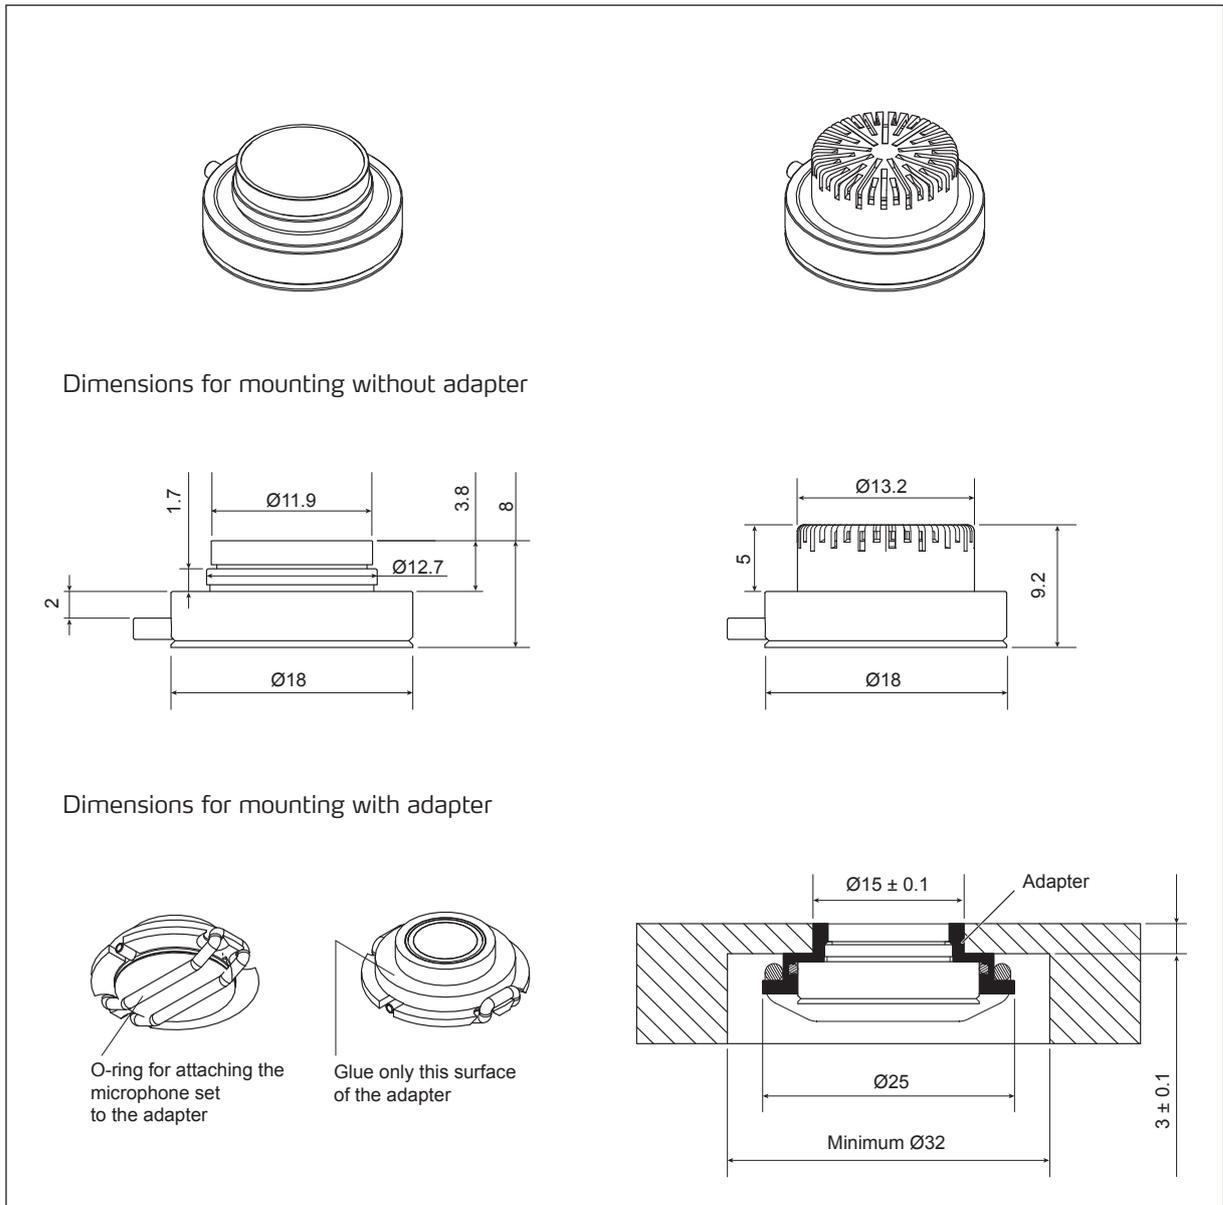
Dimensions for mounting without and with the RA0501 Mounting Adapter. All measures in mm.
